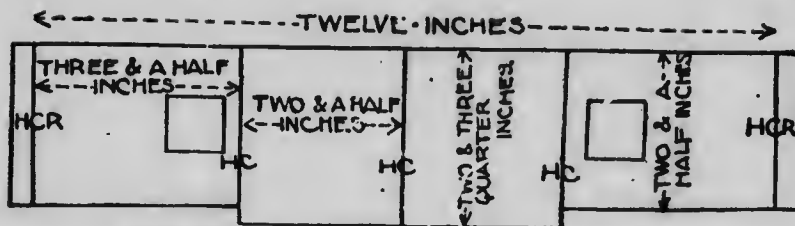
DOLL'S HOUSE. PLAN OF PORCH.
